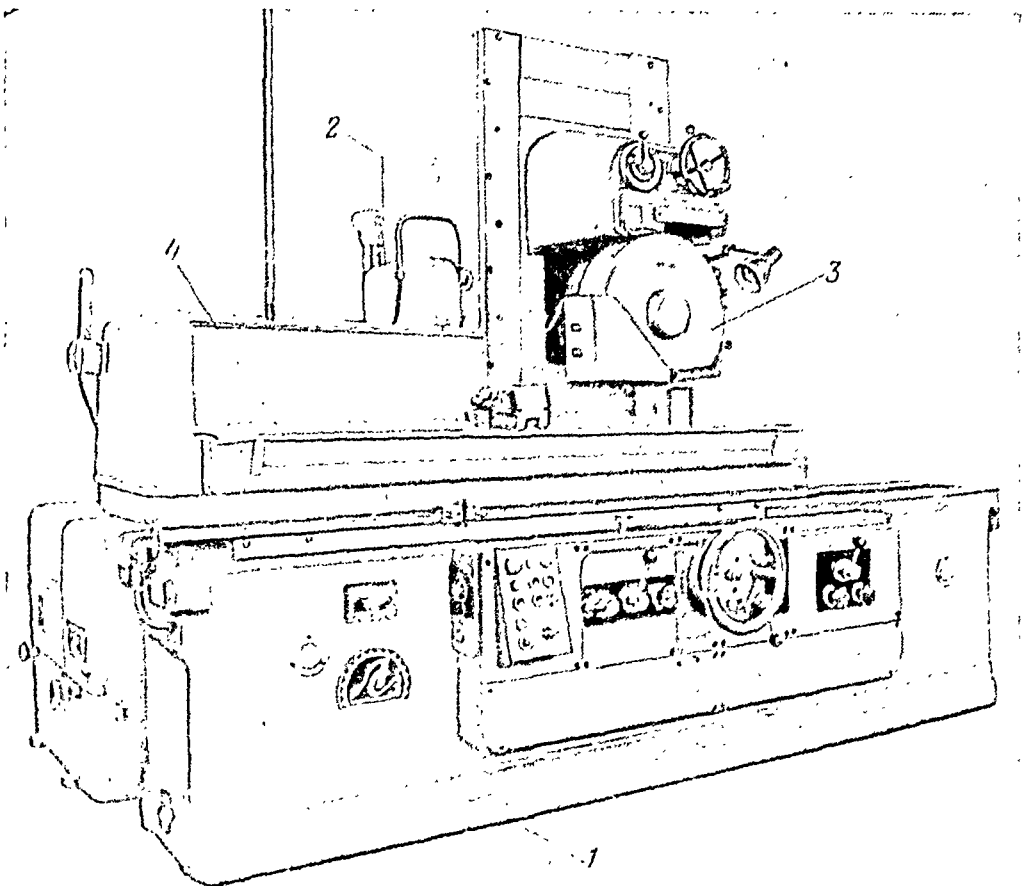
Horizontal-spindle reciprocating-table surface grinder, model 3B722:
